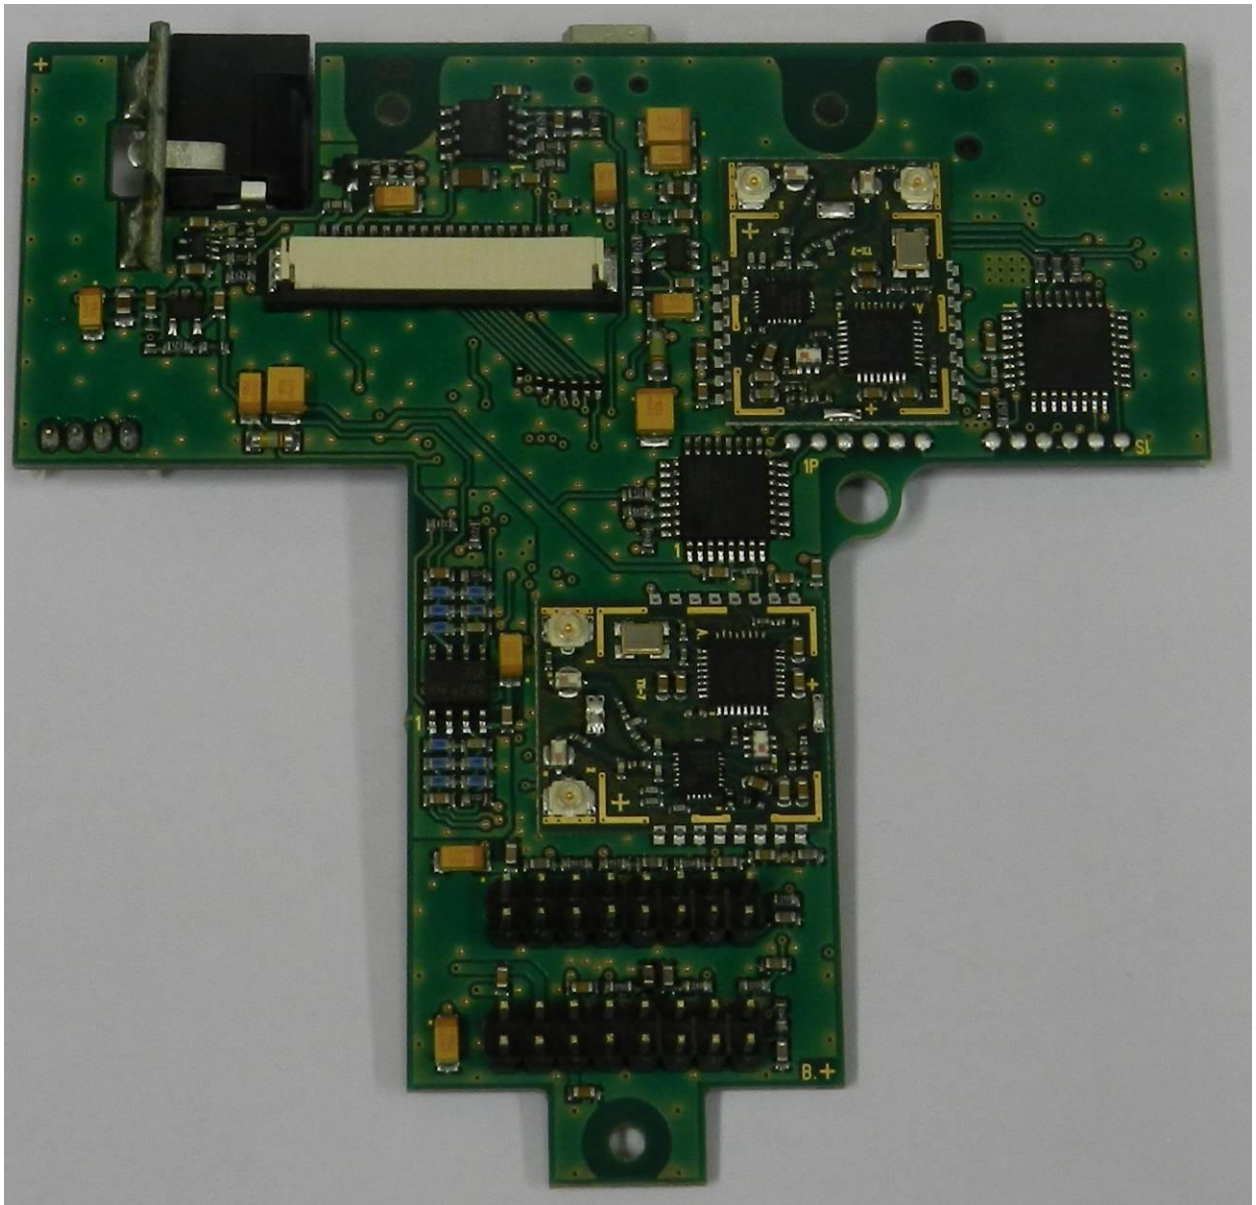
DS-CONT-2 Board Bottom (without Shield)
